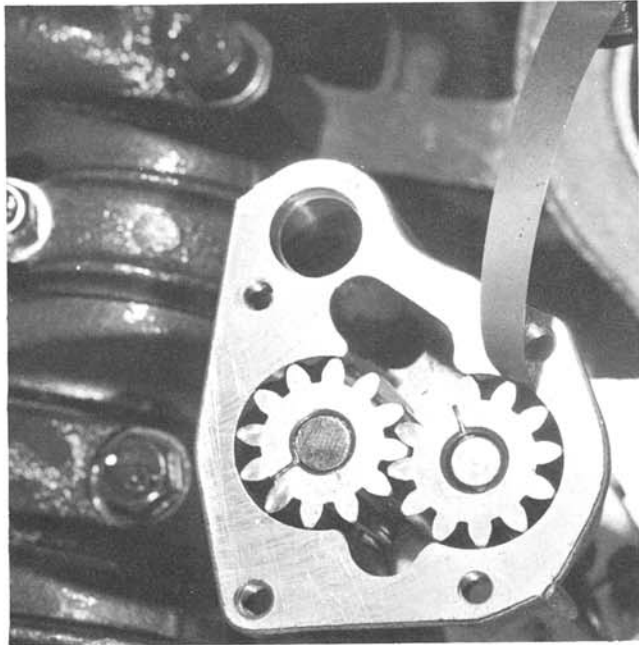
CHECKING OIL PUMP GEAR CLEARANCE
